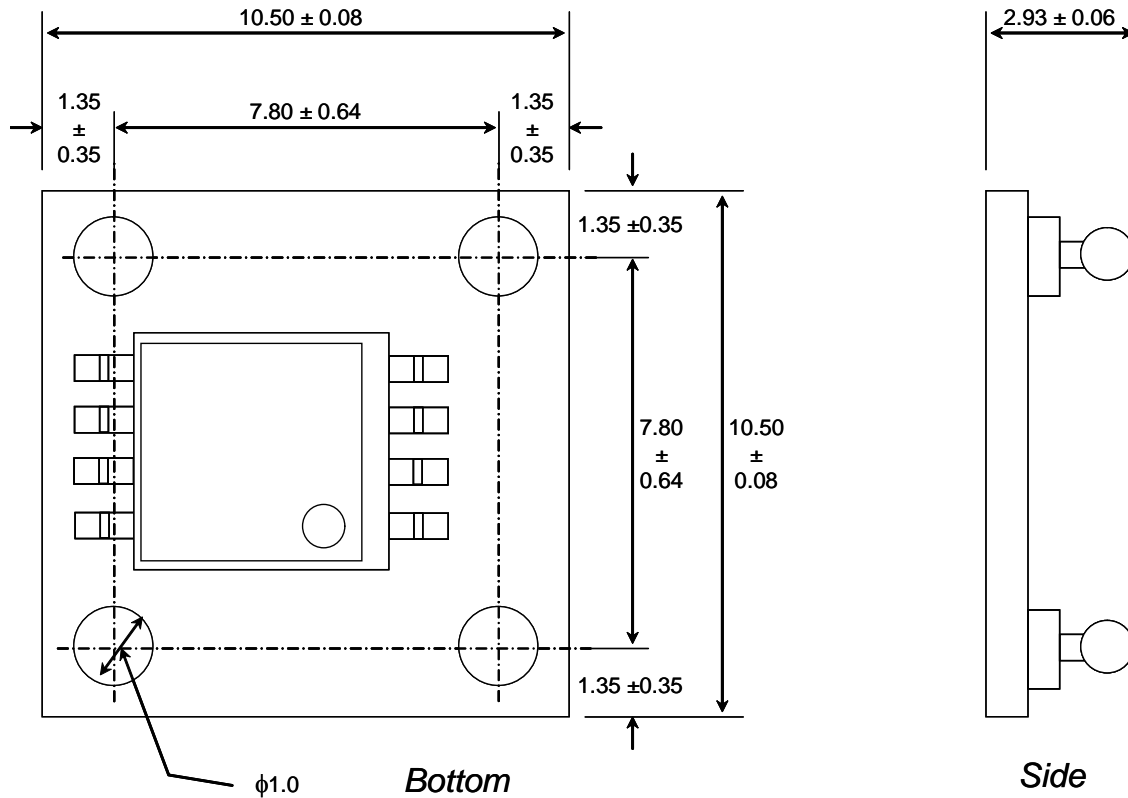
Mechanical Drawing (all dimensions are nominal and in mm)
